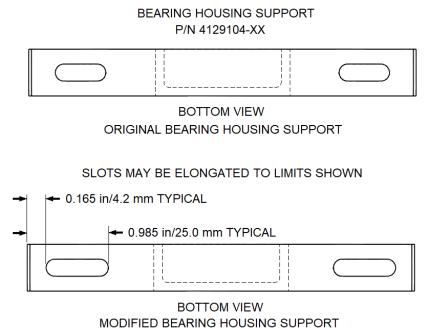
Elongation Limits of Oil Cooler Bearing Housing Supports
